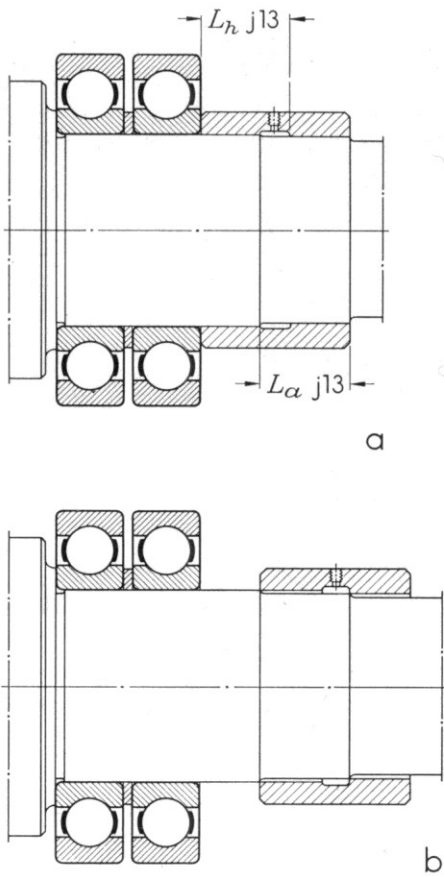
Stepped sleeve, (a) mounted and (b) free
